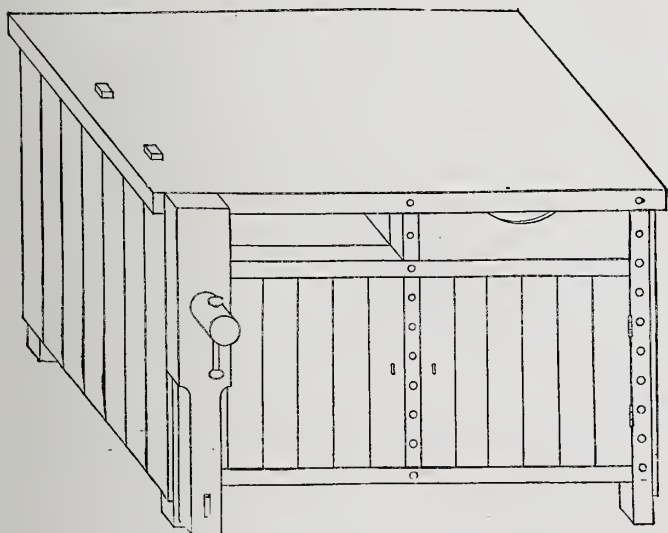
COMBINED BENCH AND TOOL CHEST.
